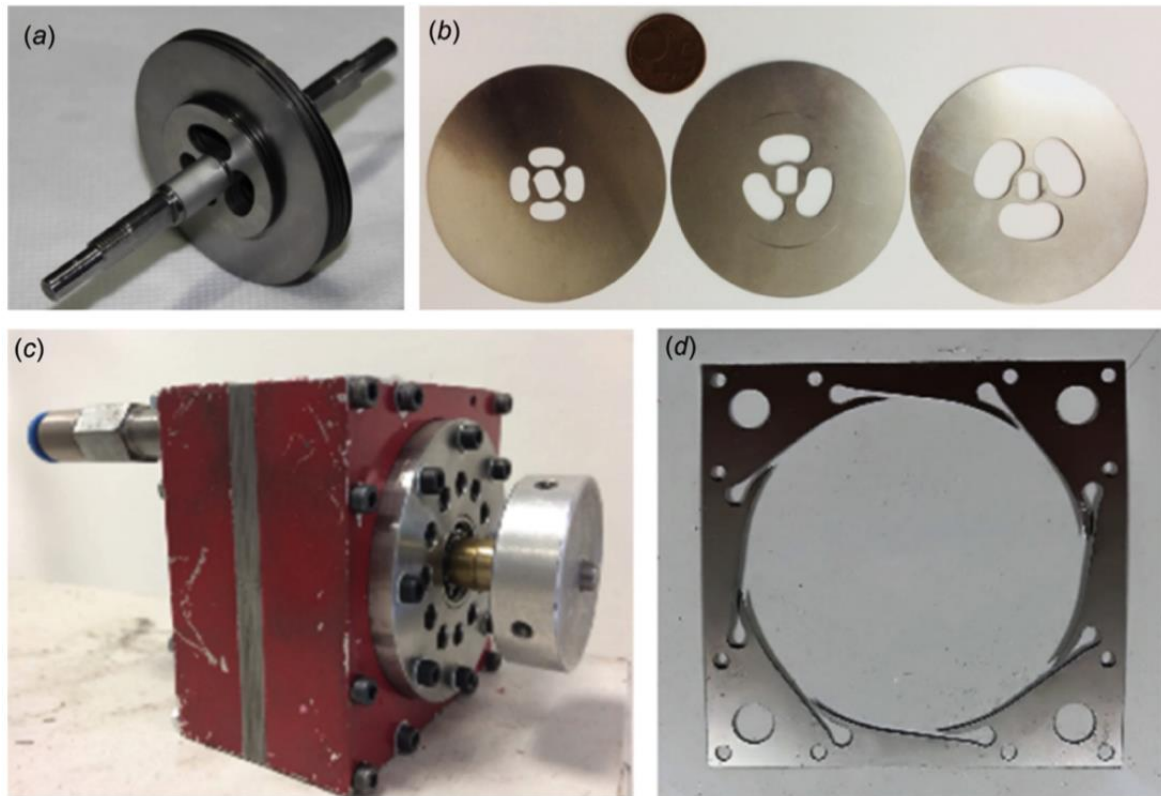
Turbine components—(a) rotor with disks, spacers, and shaft, (b) disks with different central opening, (c) assembled Tesla turbine prototype with flywheel for magnetic braking, and (d) stator element
